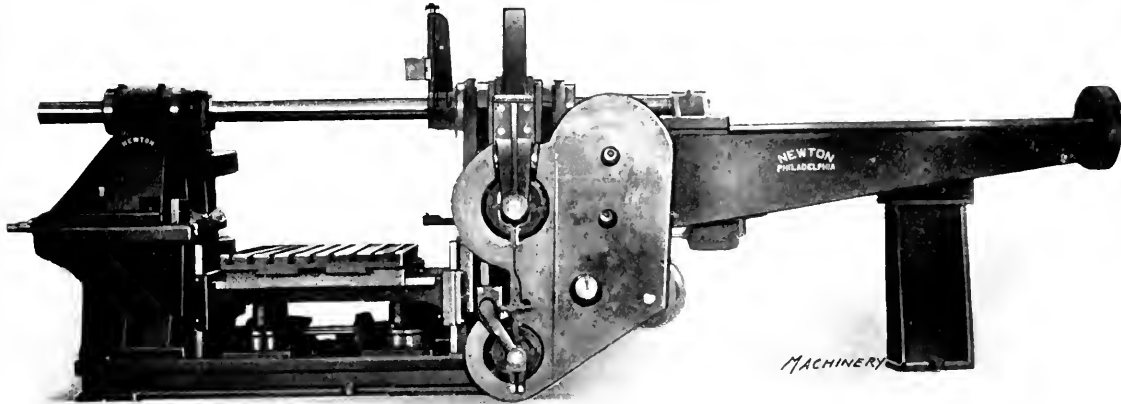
Opposite Side of Boring Machine shown in Fig. 1
